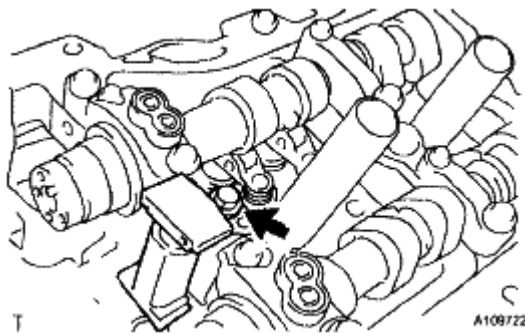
Identifying No.3 Chain Tensioner Bolt
